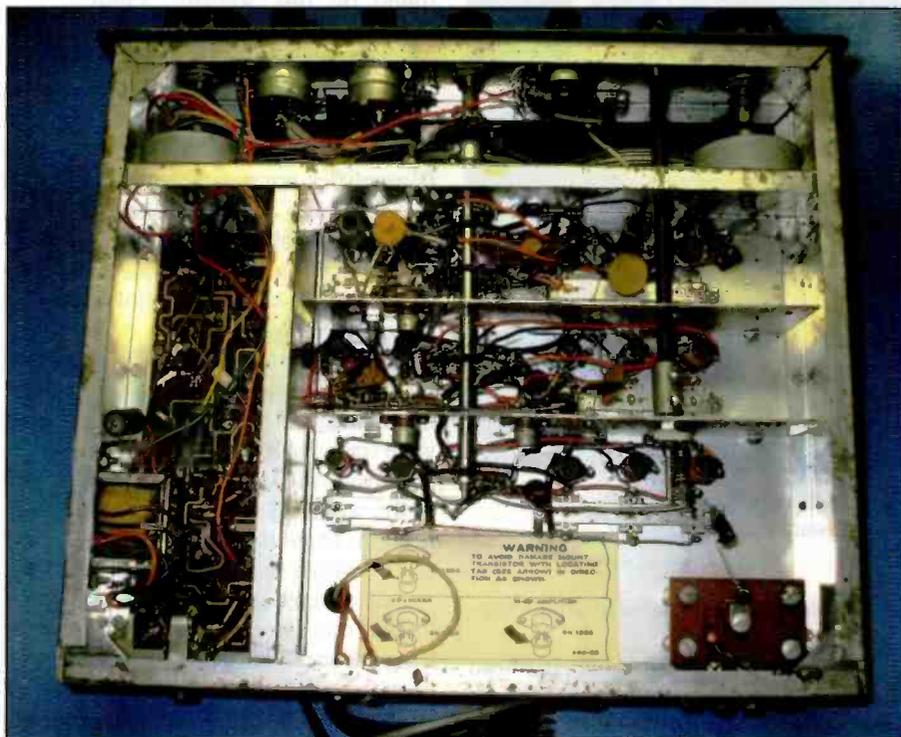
Photo C. Things below chassis didn't look well upon initial inspection. Wire insulation was burned and the soldering and mechanical assembly was horrible!
